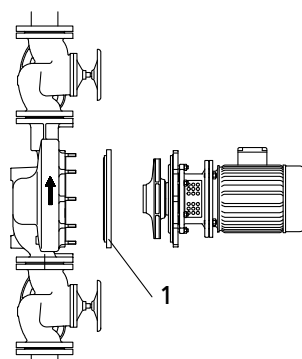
Horizontal installation with blind flange (1 = blind flange, accessory)
